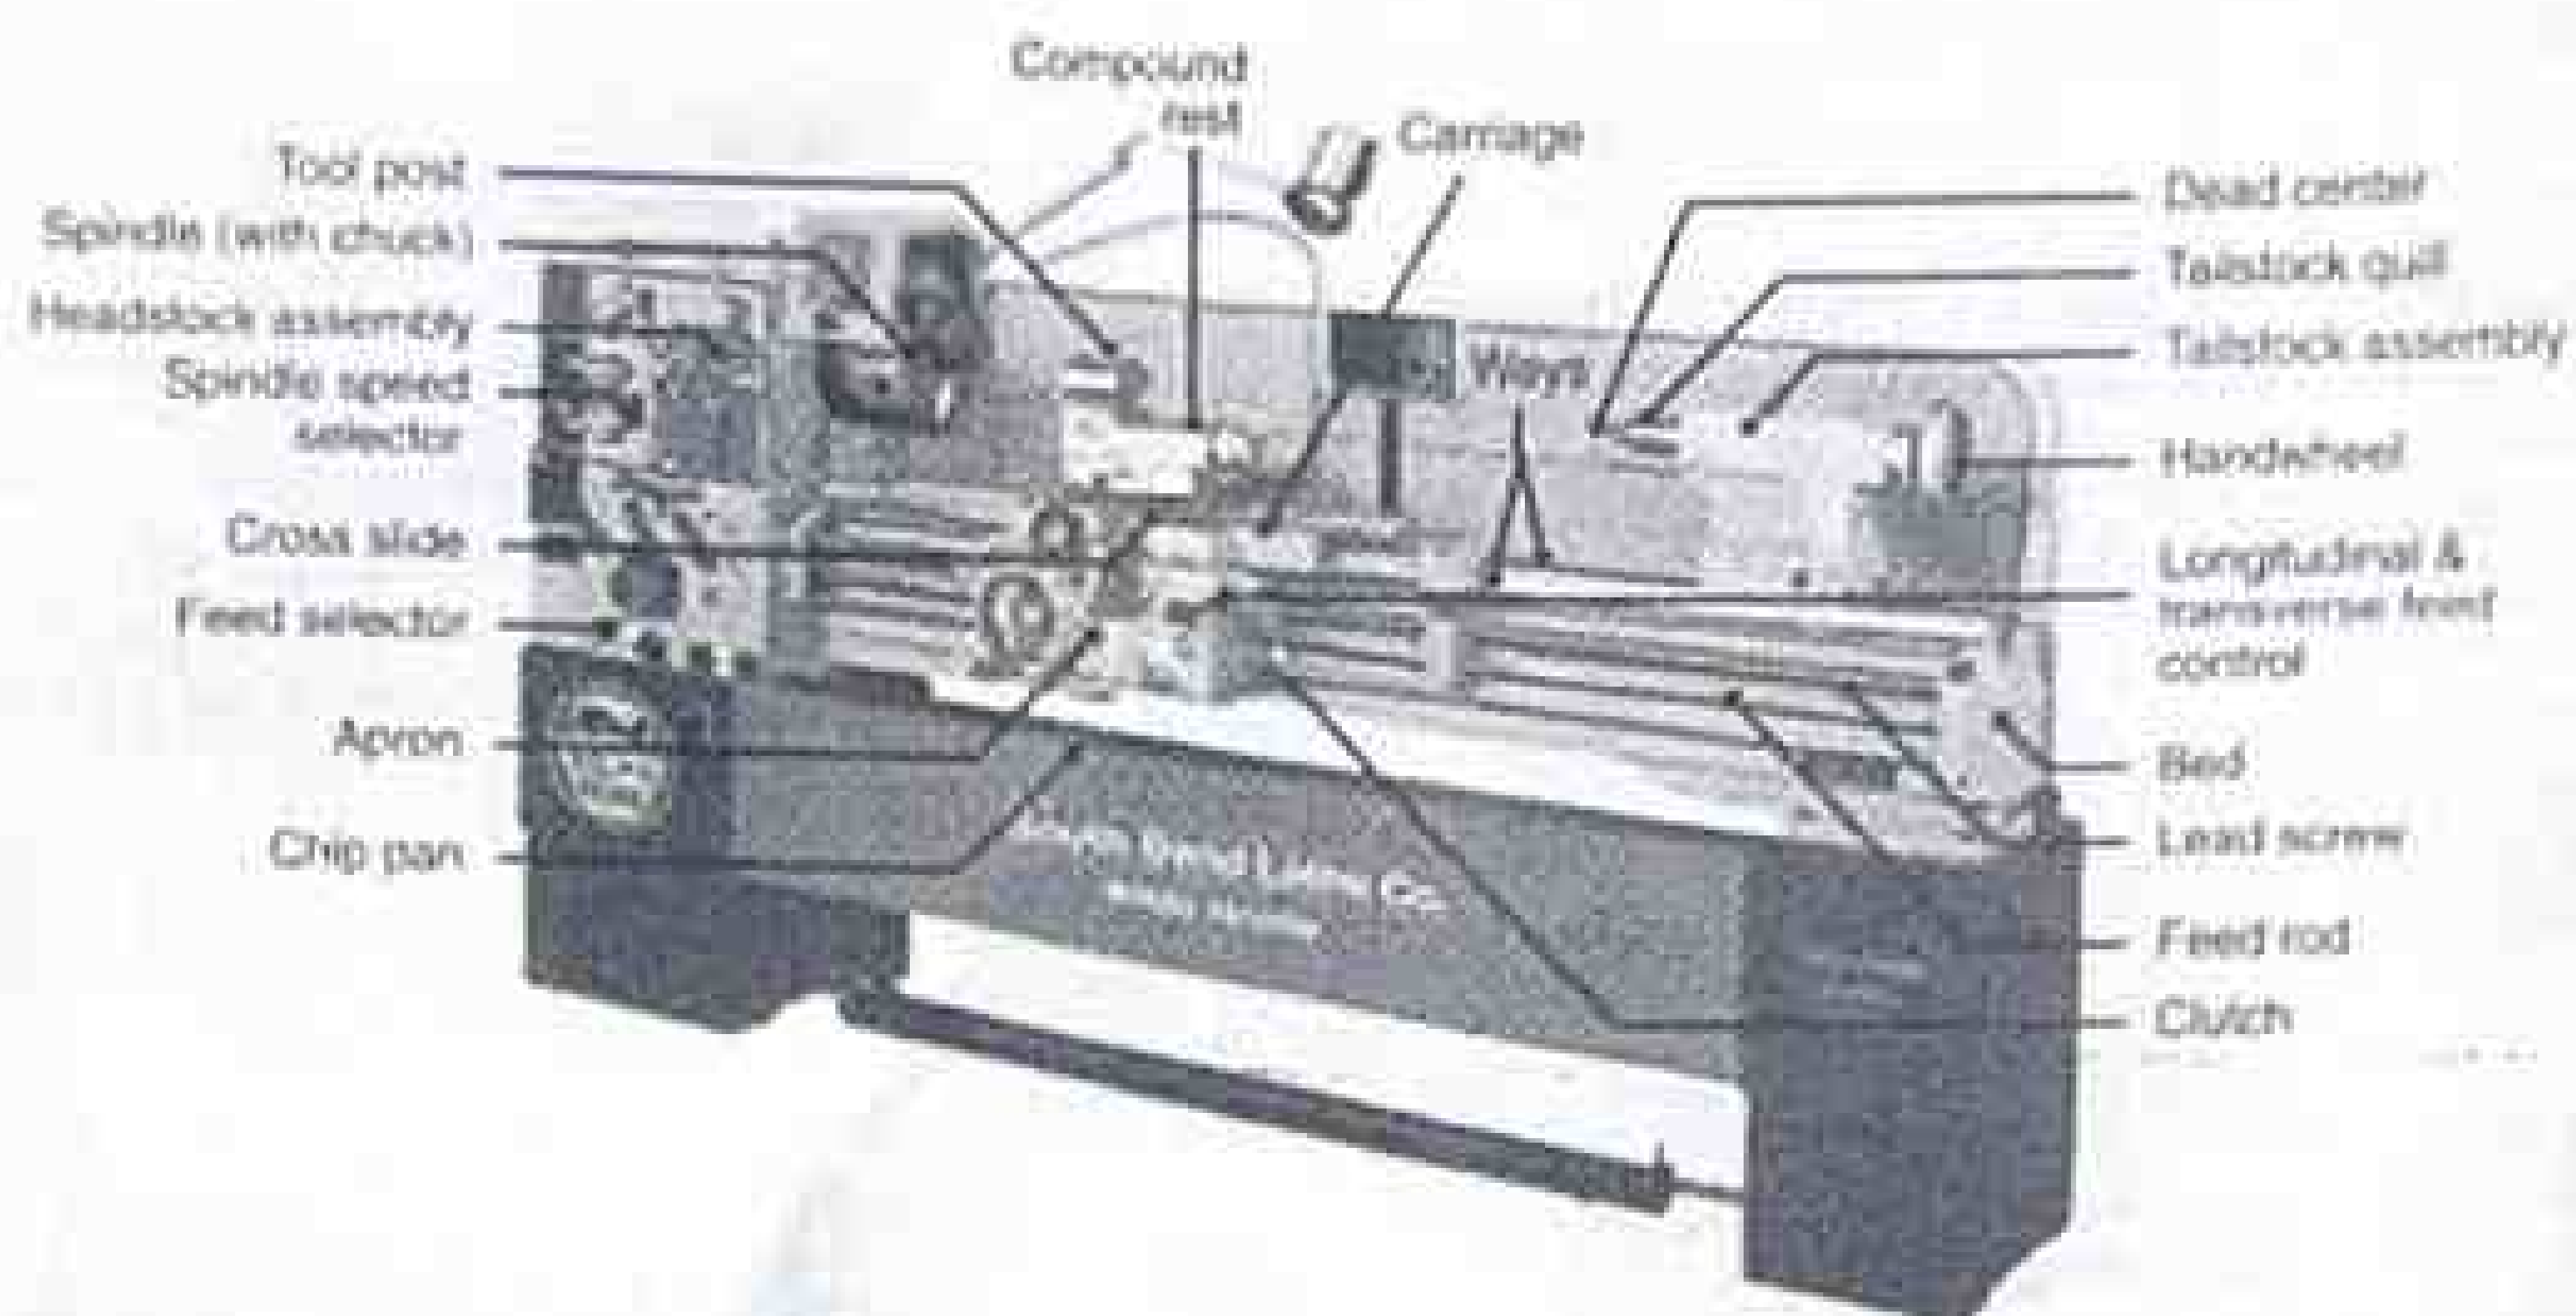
General view of a typical lathe, showing various components. *Source:* Courtesy of South Bend Lathe Co.
